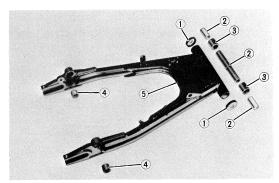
① Dust seal cover ② Spacer ③ Bearing ④ Bush ⑤ Swinging arm
